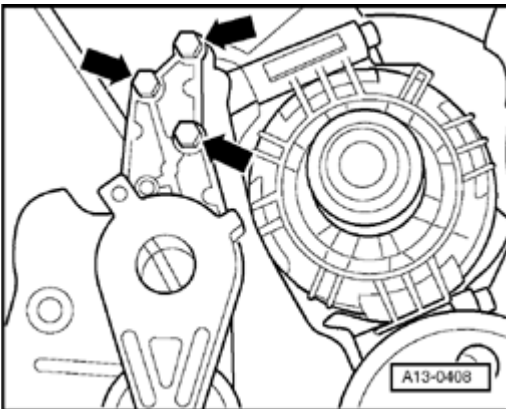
Removing/Installing Ribbed Belt Tensioner
